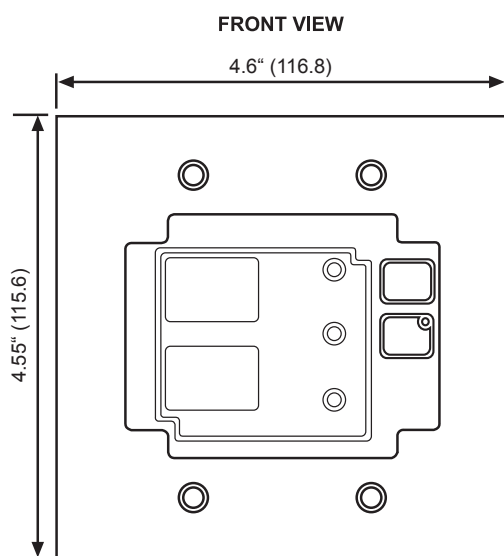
Two-gang wall plate dimensions in inches (mm)
